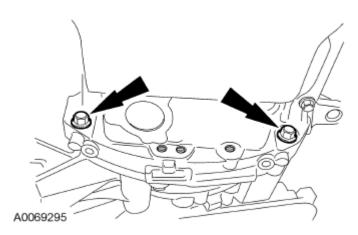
Locating Stud Bolt, Engine Mount And Bolts Courtesy of FORD MOTOR CO.
